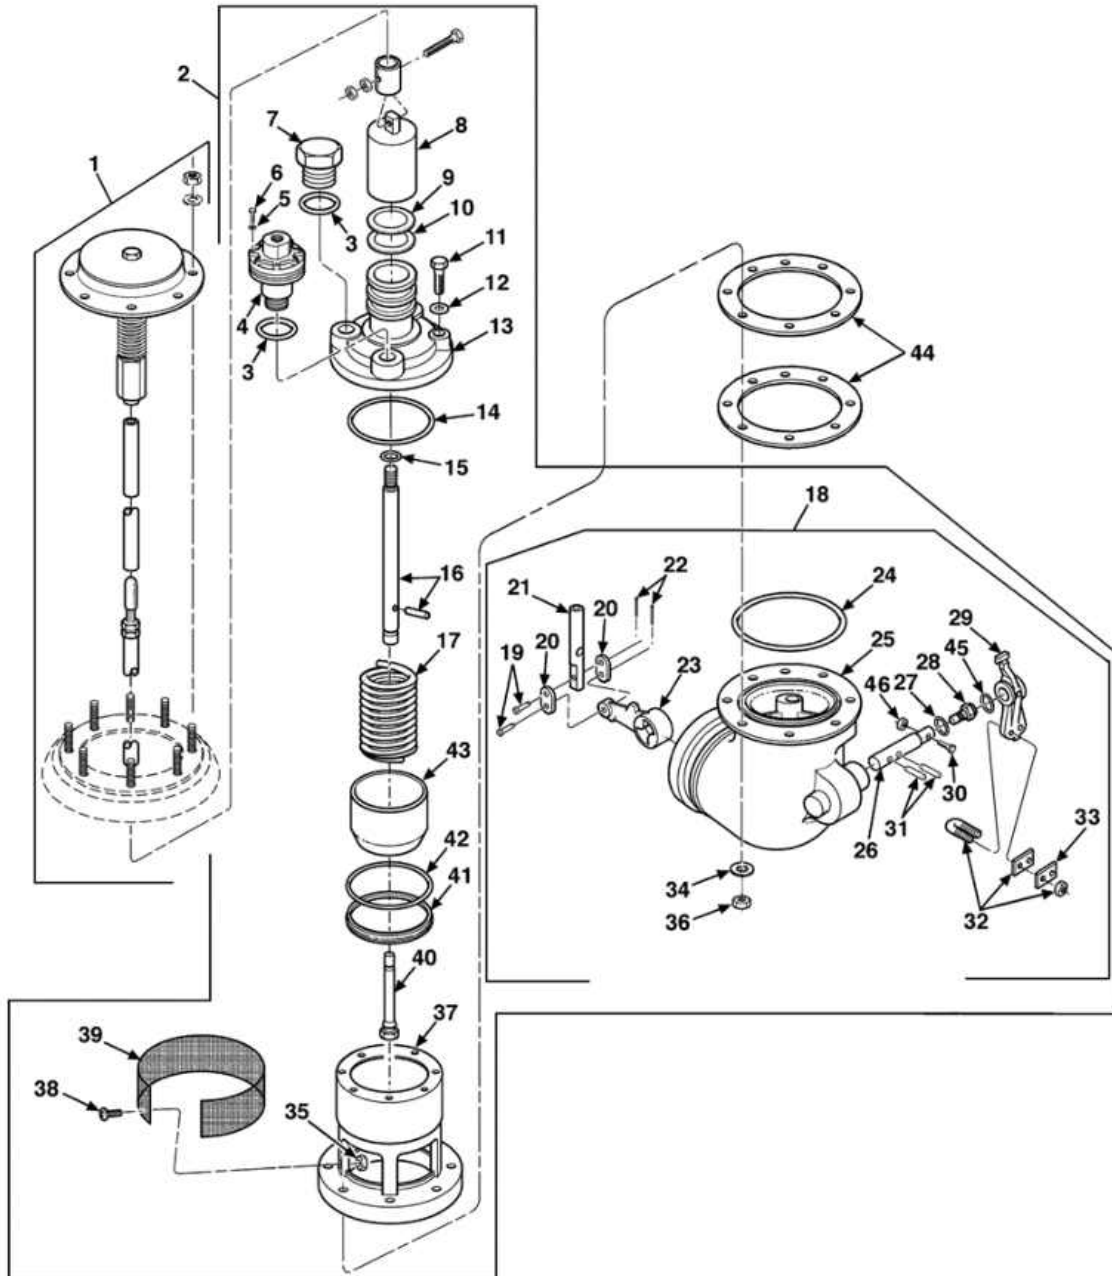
VALVE ASSEMBLY, EMERGENCY
